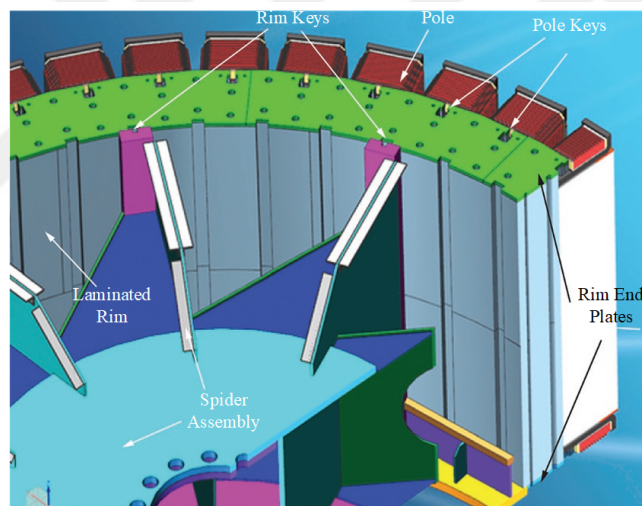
Rotor assembly of a hydro generator, adapted from [12].
